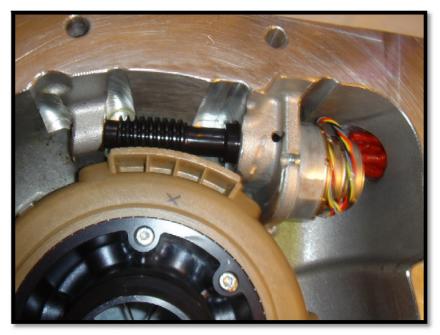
The motor with worm gear attached and drive housing in the aluminum casing. The housing has small teeth on the outside, which collates with the worm gear.
